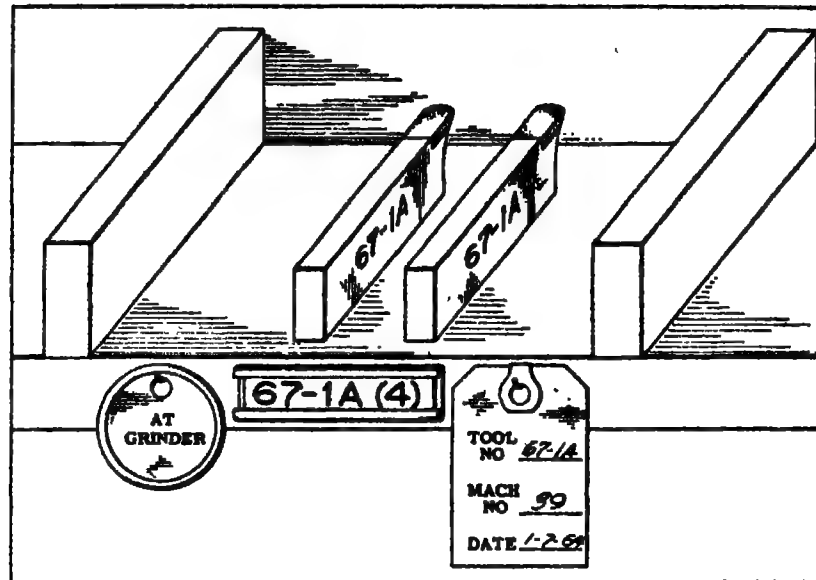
SECTION OF TOOL STORAGE RACK USED IN THE TOOL SUPPLY SYSTEM DESCRIBED IN EXAMPLE I. LABEL INSERTED IN HOLDER ON FACE OF SHELF CARRIES IDENTIFICATION NUMBER AND STOCK QUANTITY OF TOOL. (THERE ARE FOUR COPIES OF TOOL NUMBER 67-1A: TWO IN THE RACK, ONE AT MACHINE NUMBER 39, AND ONE AT THE TOOL ROOM BEING RE-SHARPENED.)
